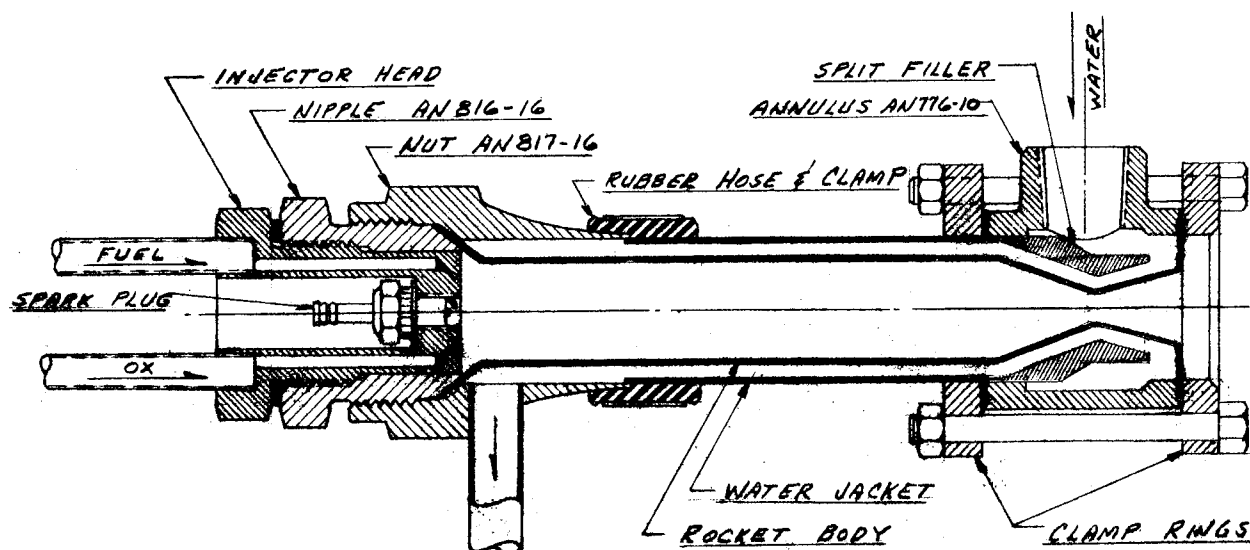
Assembly, 10 pound thrust gaseous rocket motor.
